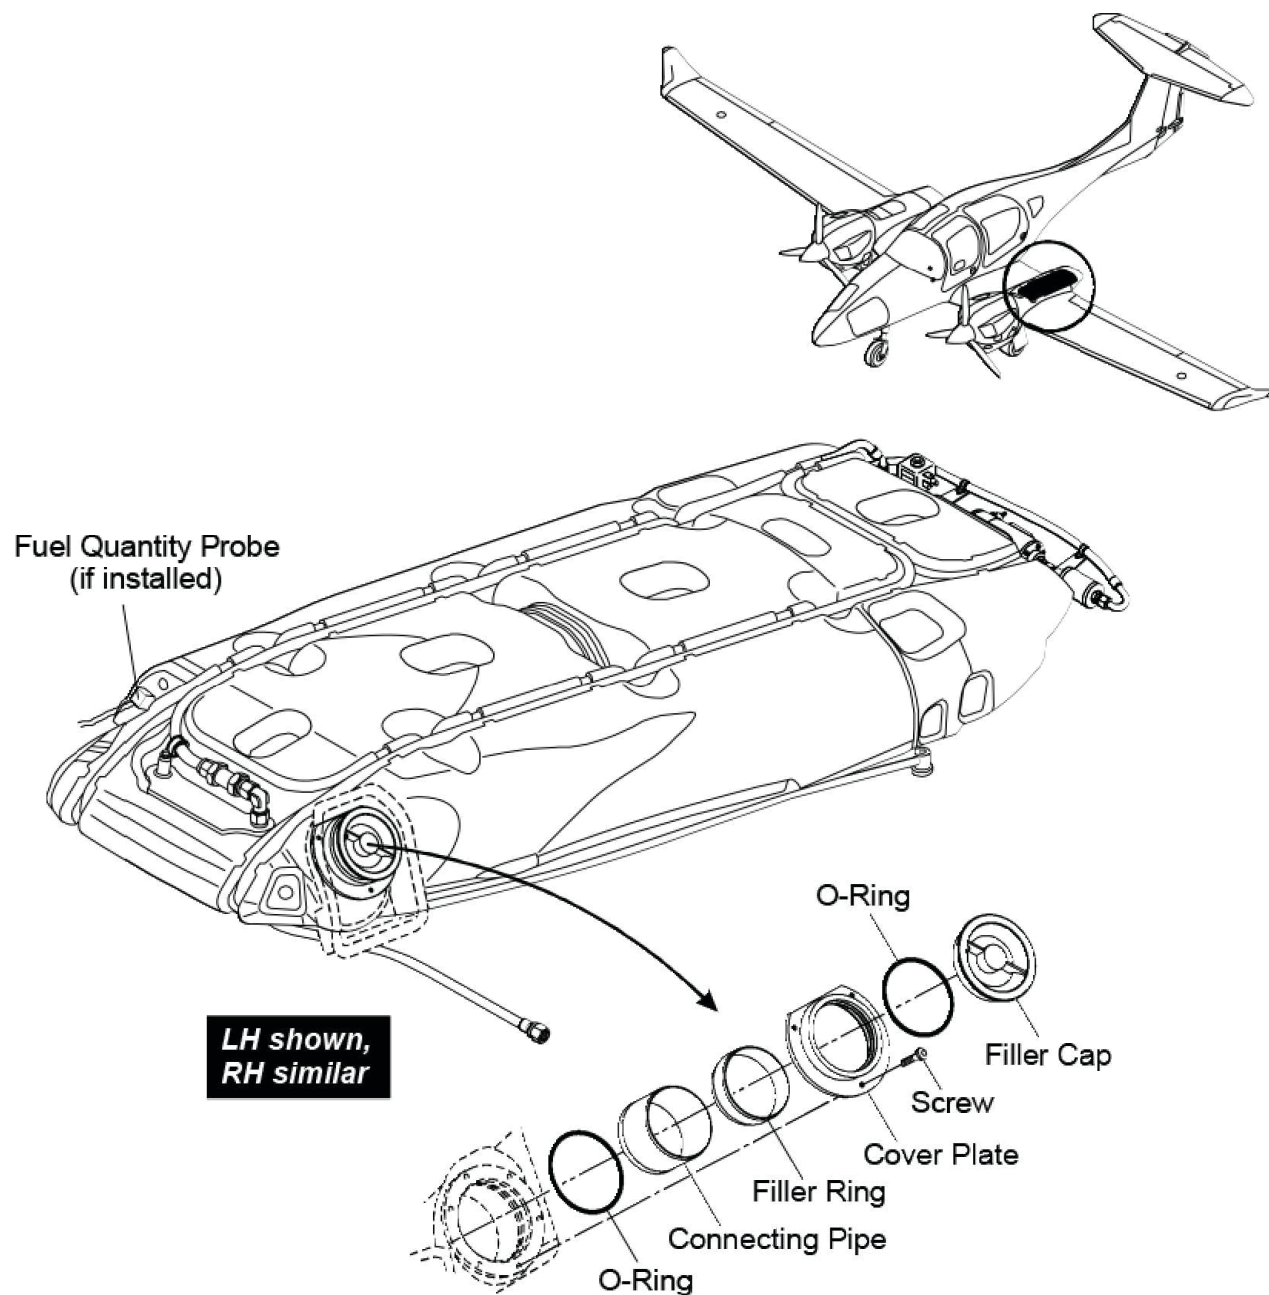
Auxiliary Tank Fuel-Filler - Installation
